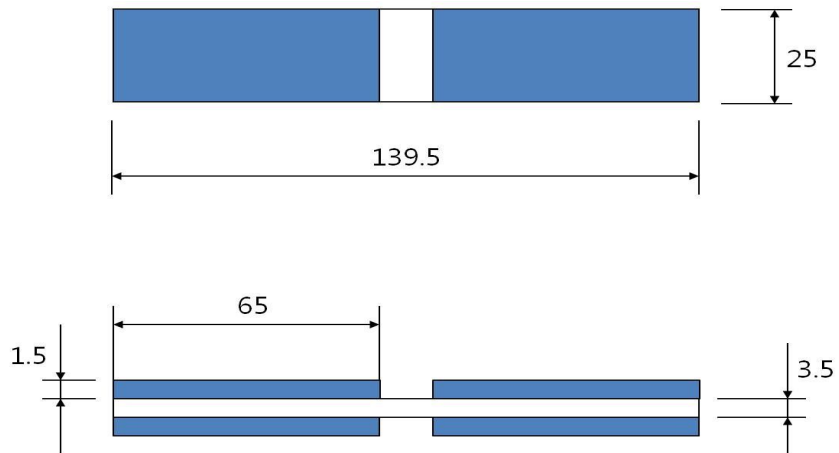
Dimension and Shape of Compression Specimen 90°
